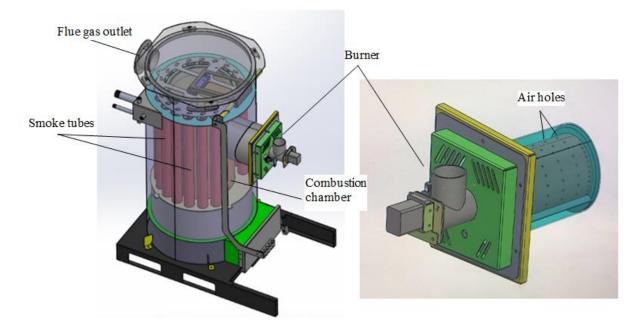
Isometric view (left) and burner (right) of the horizontal-fed boiler
